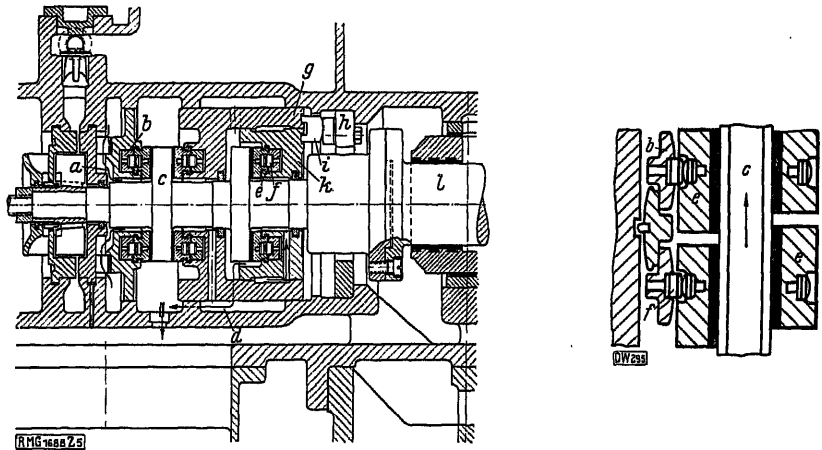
Westinghouse*, thrust bearing with two collars and movable pads supported on points (steel discs)
